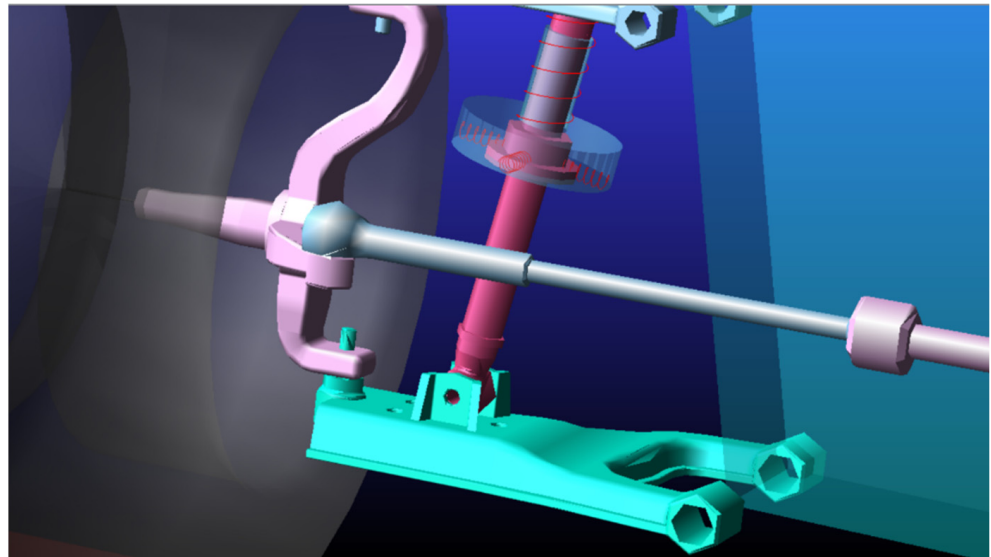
Spherical Joint of Tie Rod with Spindle Wheel—HP5.
